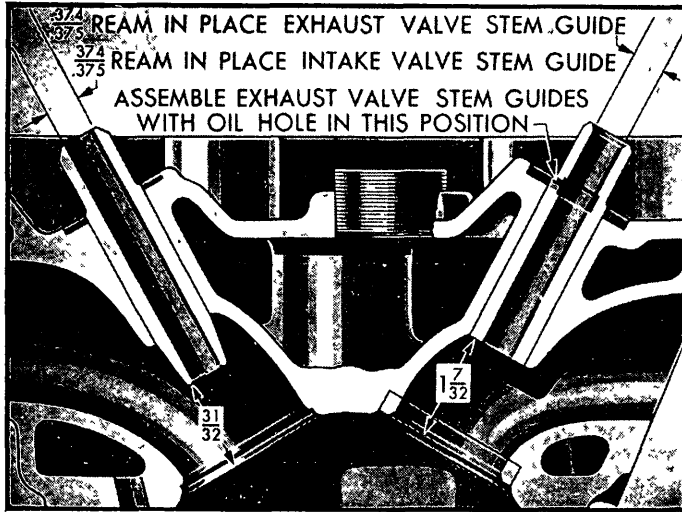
Chrysler and De Soto V8 valve guide position. 1951-52
